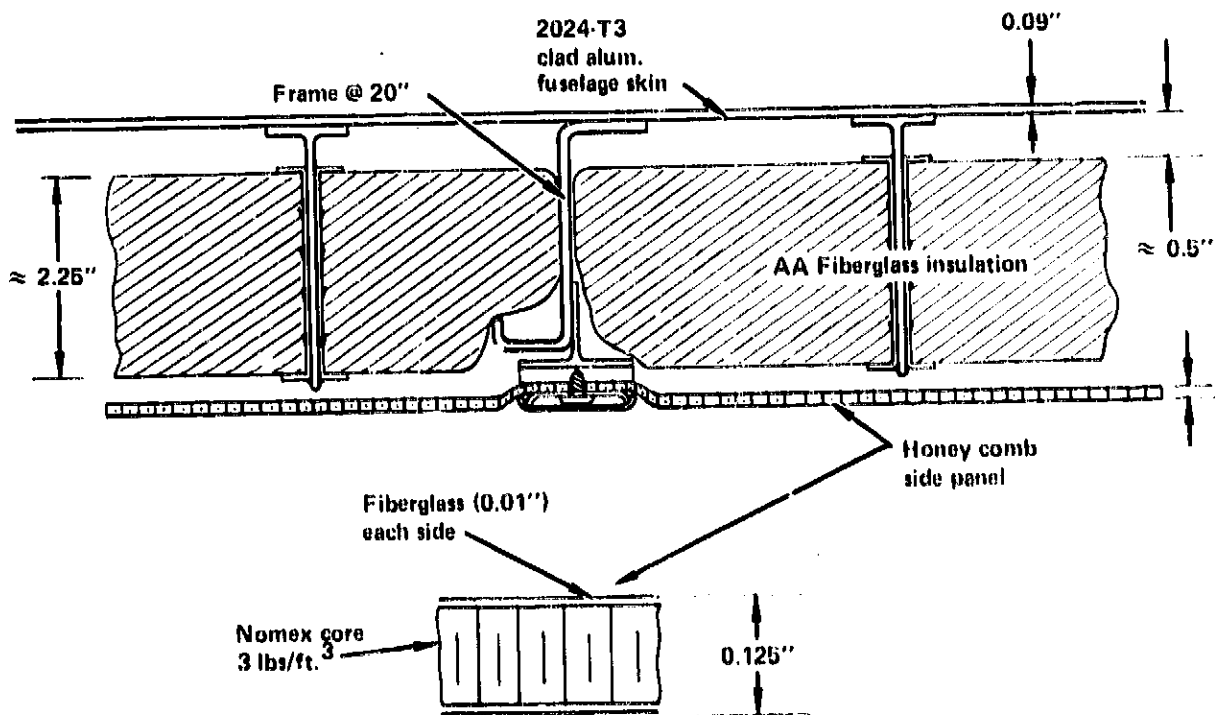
L-1011 fuselage sidewall (typical cross section).
